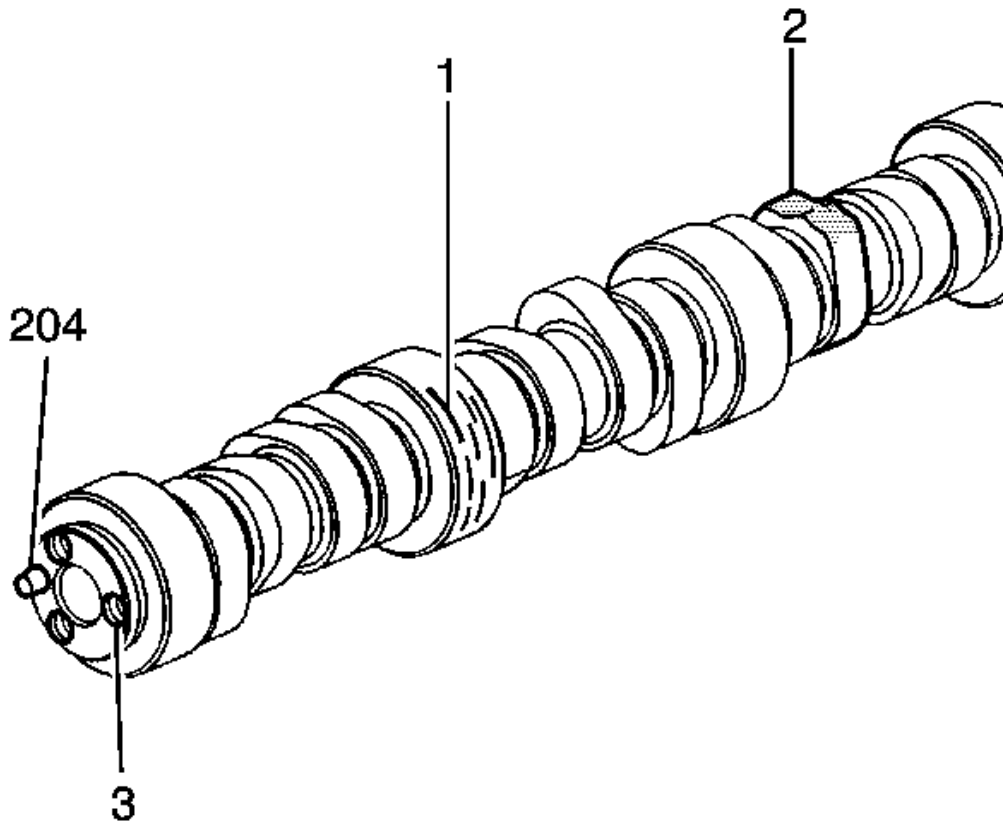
Identifying Camshaft & Bearing Inspection Areas
